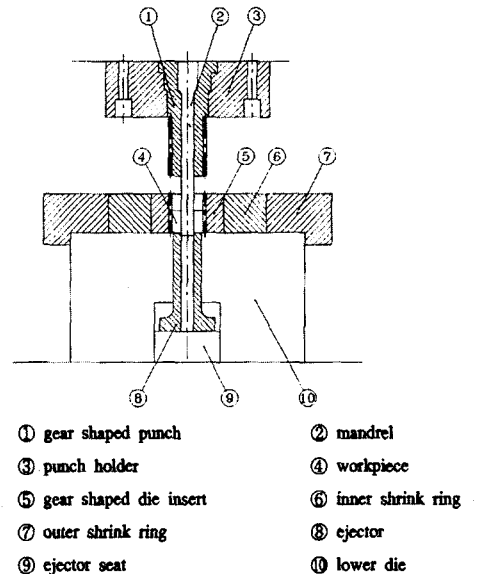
Schematic drawing of die set for guiding type forging of a spur gear
